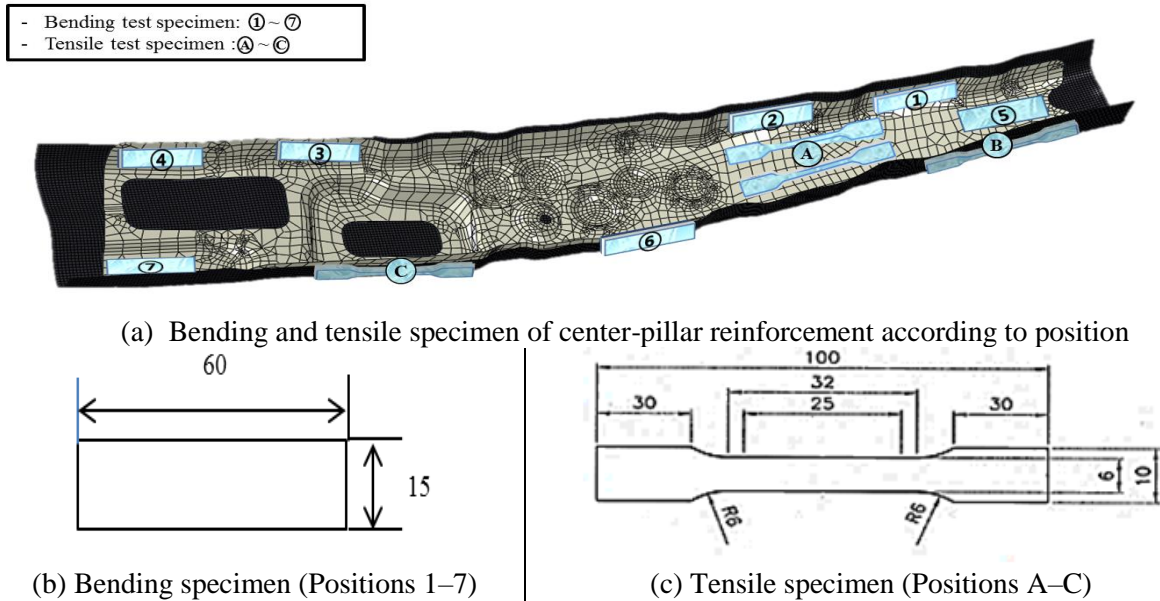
Bending and tensile specimens according to position and specimen dimensions
